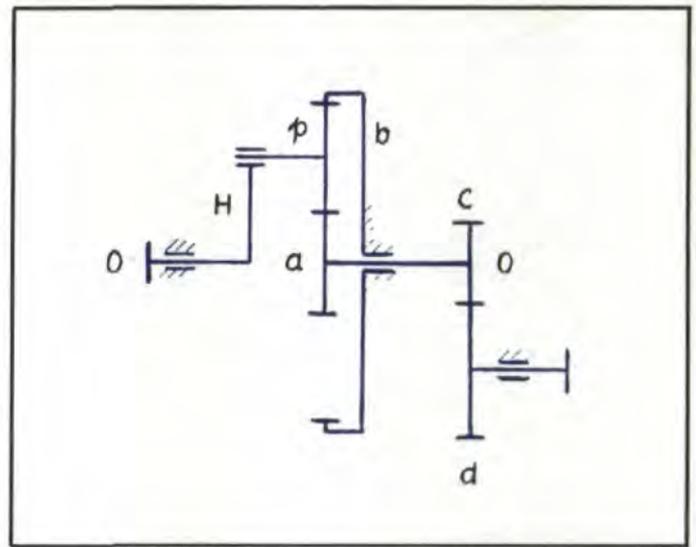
Moving-axis gearing & fixed-axis gearing.
